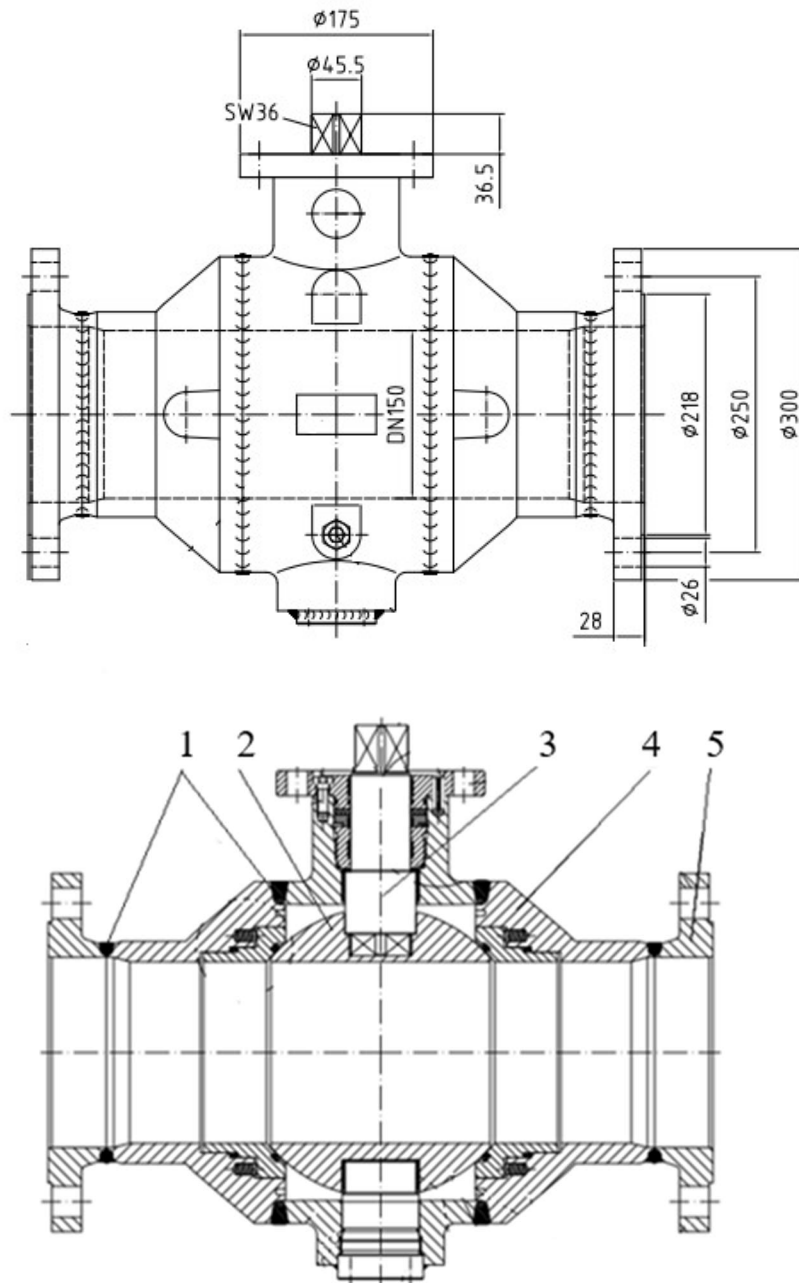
Typical design of hydrogen ball valve DN 150 of Boehmer Ltd [50]:
